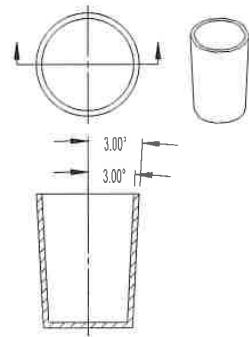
Draft on the inside and outside surfaces of a part should be equal and parallel.
